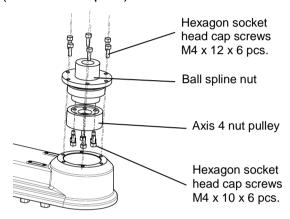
Dismounting ball screw spline nut (KHL-300, KHL-400)
